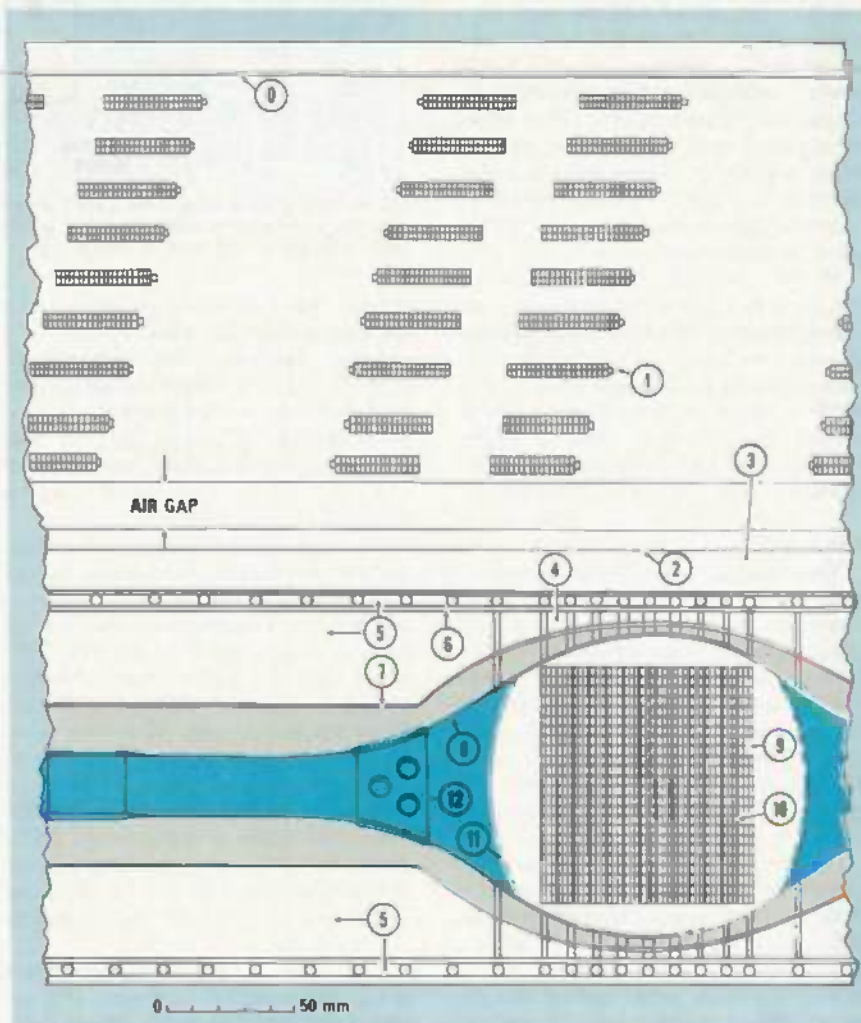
SUPERSEA ARMATURE. Armature shield (0); armature conductors (1); rotor damper shields (2); ambient temperature damper (3); compression spacers (4); vacuum (5); heat shield (6); liquid-helium containment vessels (7); rotor-torque transfer banding (8); Nb-Ti field winding (9); cooling ducts (10); field-winding containment block (11); rotor torque transfer coupling (12).
